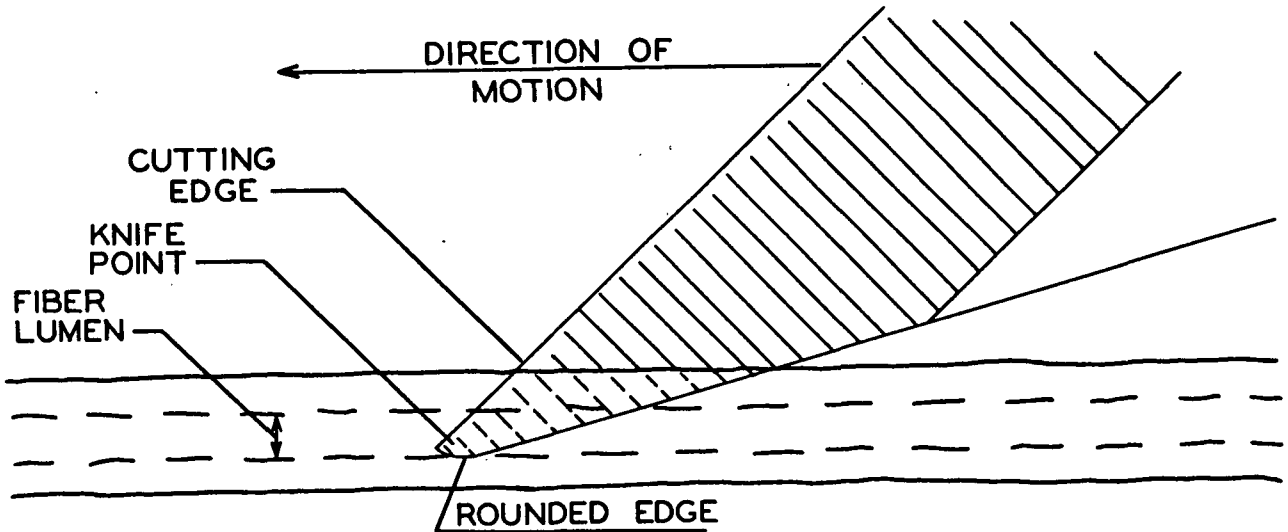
A Schematic Drawing of the Basic Slitting Technique
